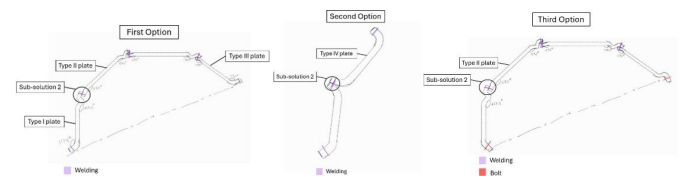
Three preliminary designs for side panels with welding or bolt connections.
